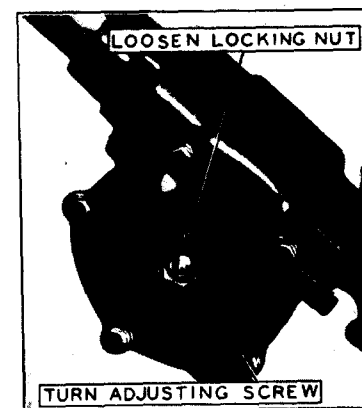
This adjustment is on the cover plate of the steering gear housing, and is to take up end play in the sector shaft.
